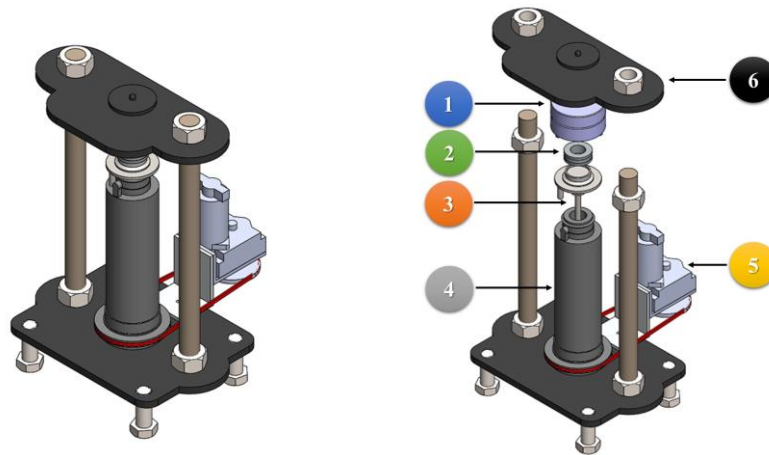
The assembly view and the exploded view of the FPB loading frame: 1. Force transducer, 2. Thrust ball bearing, 3. Piston, 4. Mounting post, 5. DC motor, 6. Frame upper plate.
